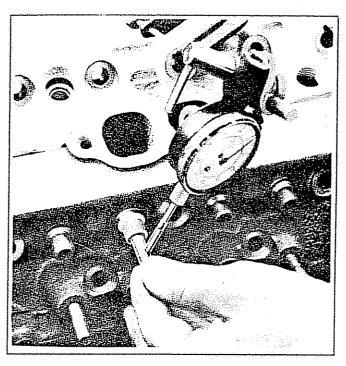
A2-19-Measuring Valve Stem Clearances-Typical
